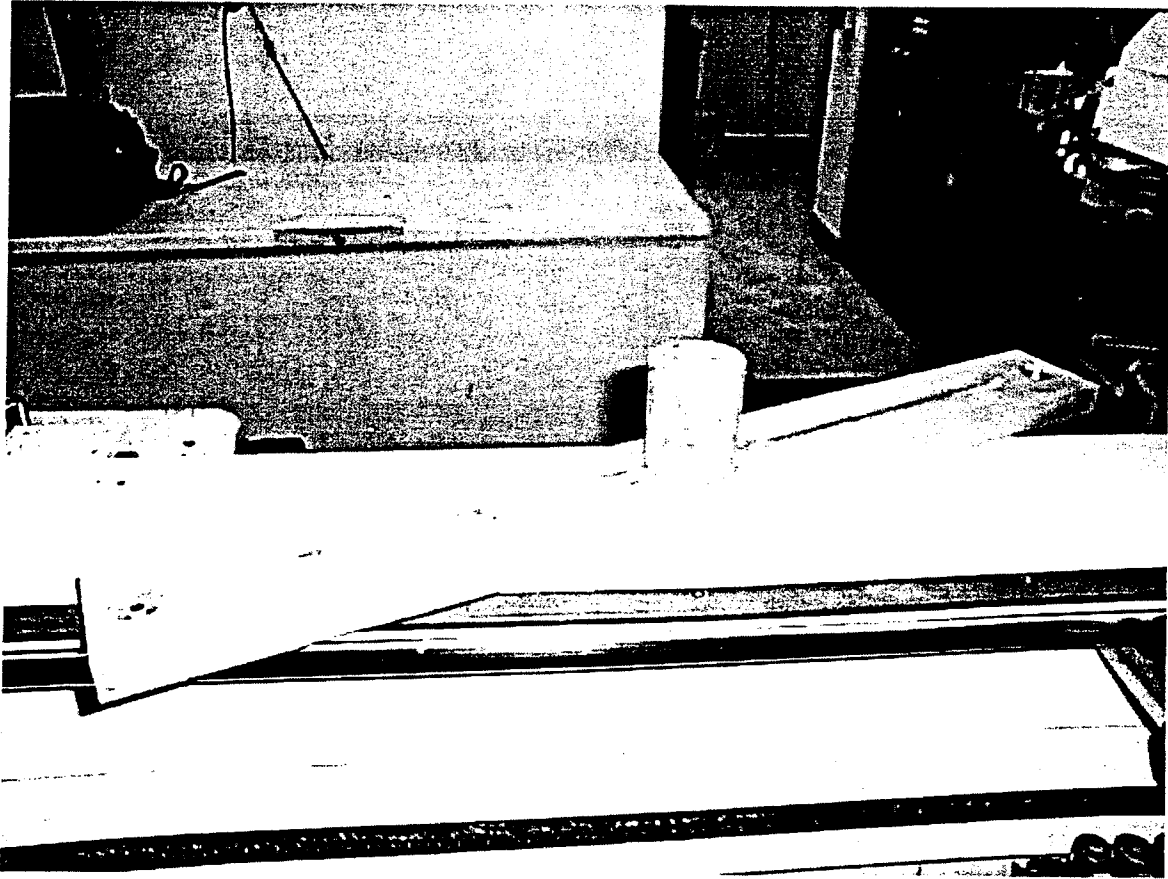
Aluminum bar used in the outer shell support tooling.
